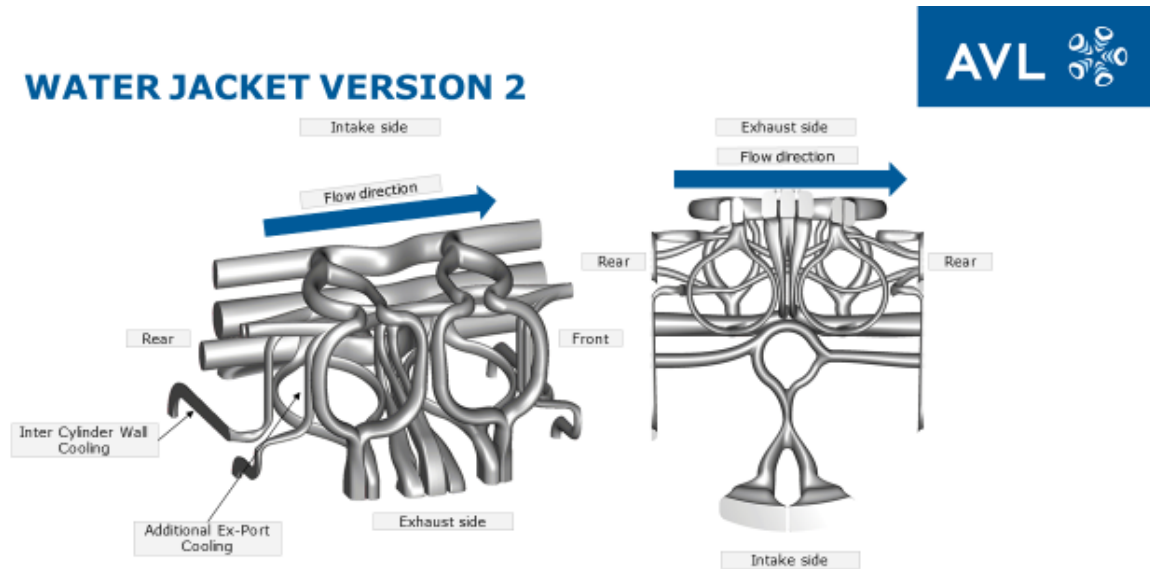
Updated Water Jacket with Wall Cooling between Cylinders
